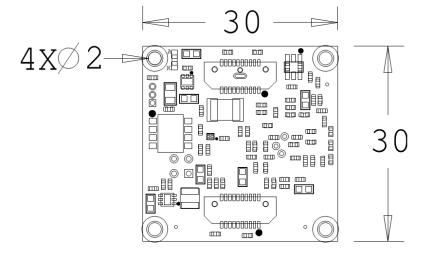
Front Portion of See3CAM_CU40 Base Board mechanical dimensions
